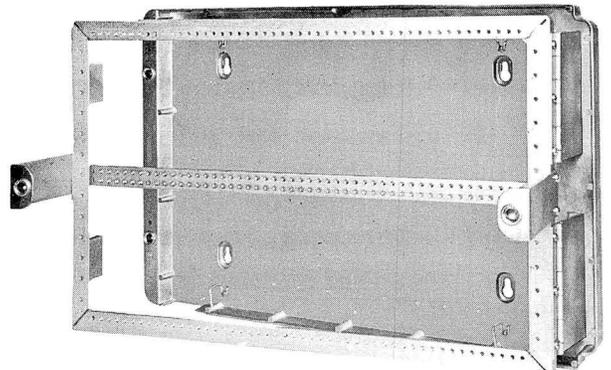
S-C 16C Apparatus Mounting Cabinet.
